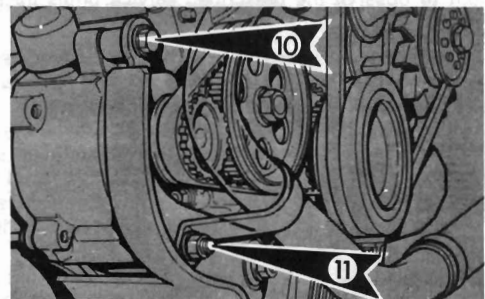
Air pump mounting bolts (10 and 11) (Sec 27)
